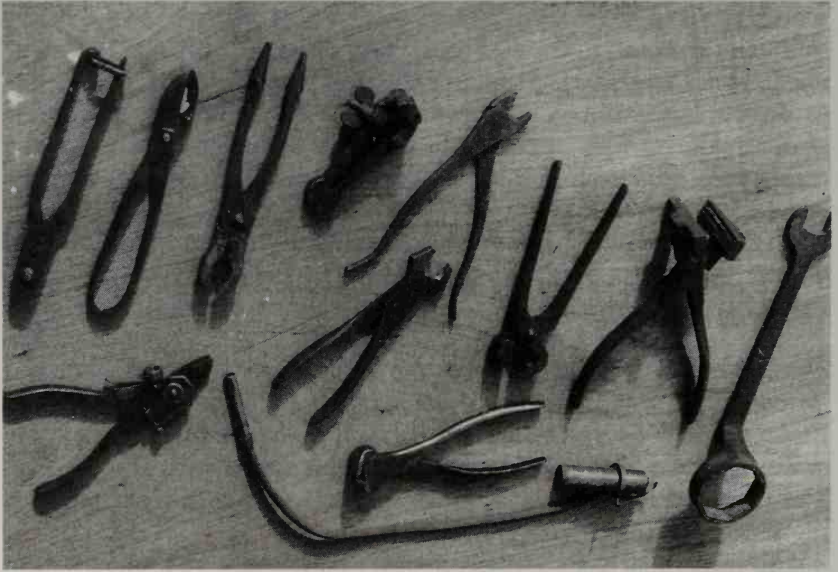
Plier-action gripping and cutting tools, with a saw set, a large spanner and a mouth blowlamp
